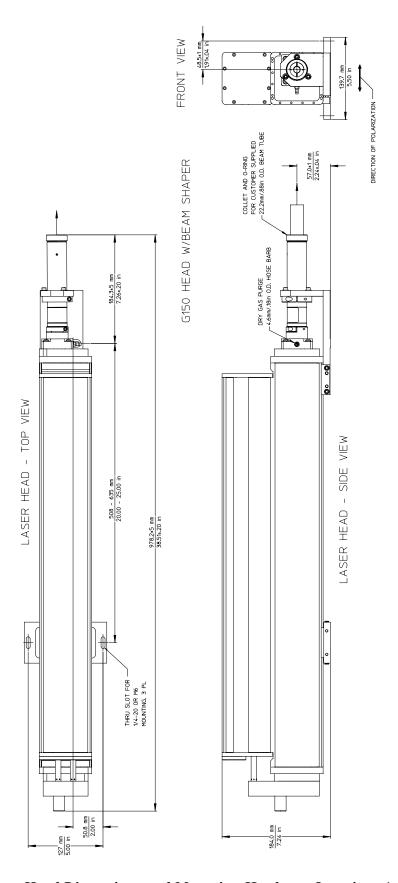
Laser Head Dimensions and Mounting Hardware Locations (w/Beam Shaper)
